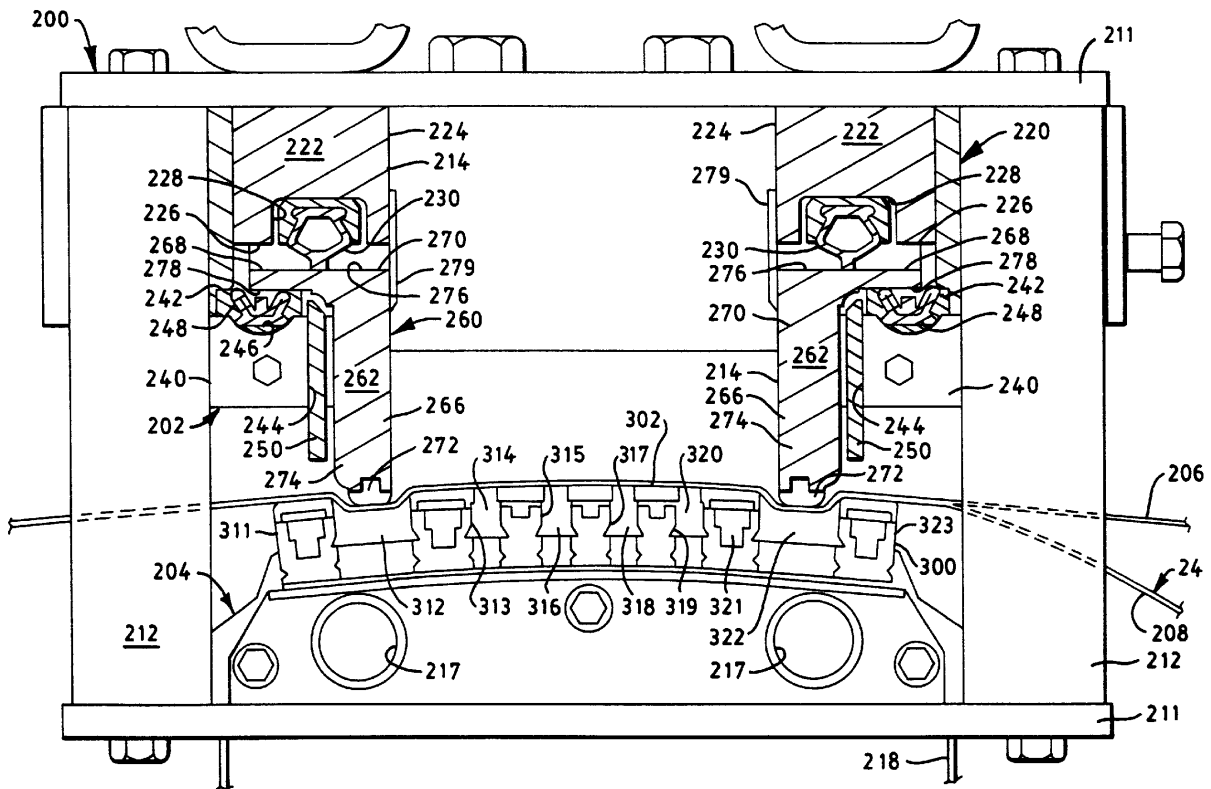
Detailed Side View of the Air Press Showing the Central Chamber.
